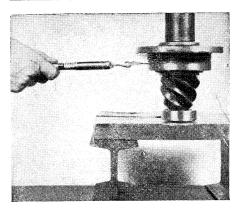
Checking pinion bearing preload torque with wire and pound scale
